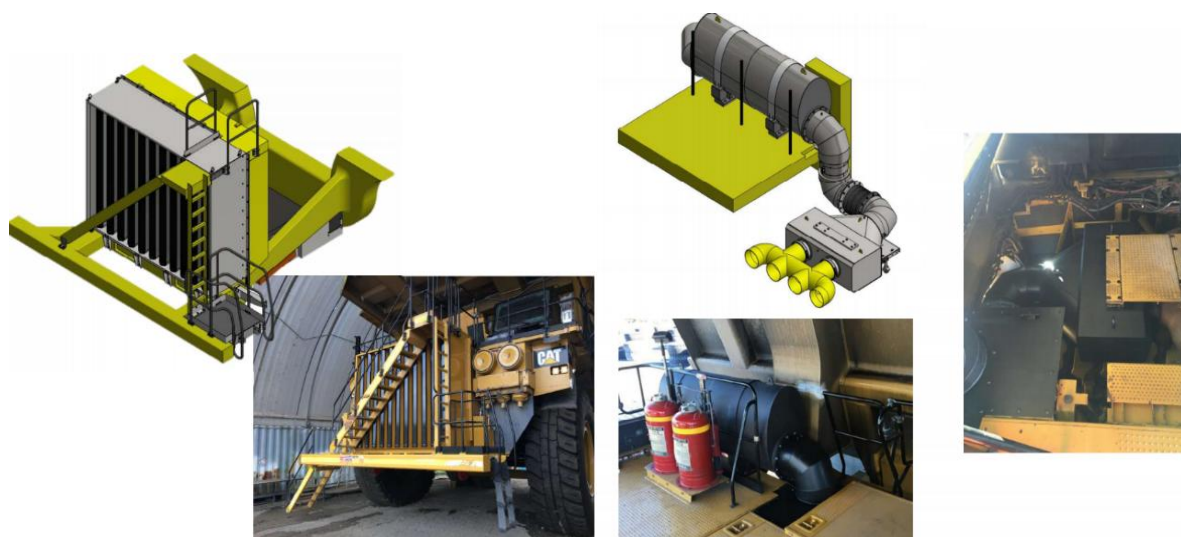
Truck Engineering Control Package Components Examples (Radiator Left, Exhaust Right)
